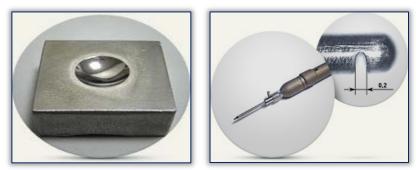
Examples of machined parts with ECM made from stainless chrome-nickel steels [9]
